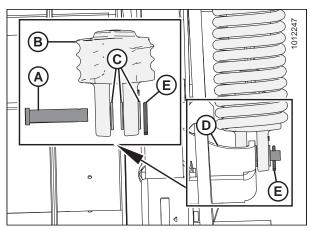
Left Side Spring Float Assembly Shown – Right Side Opposite
